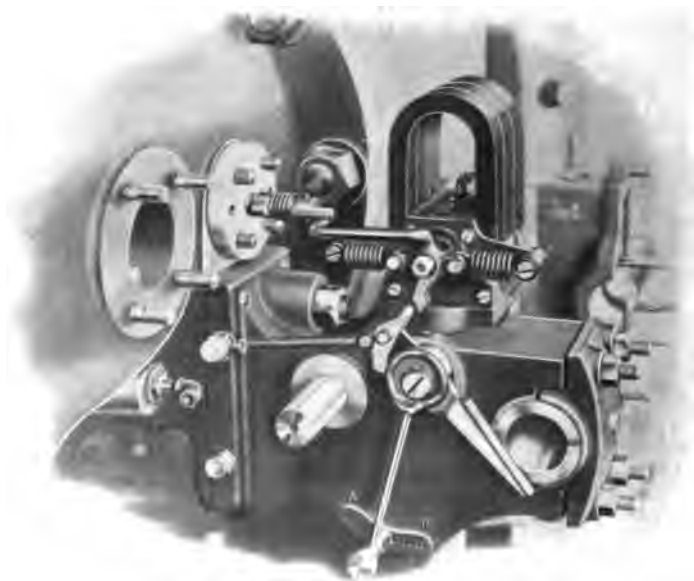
Igniter Details, Olds Type K Engine.
